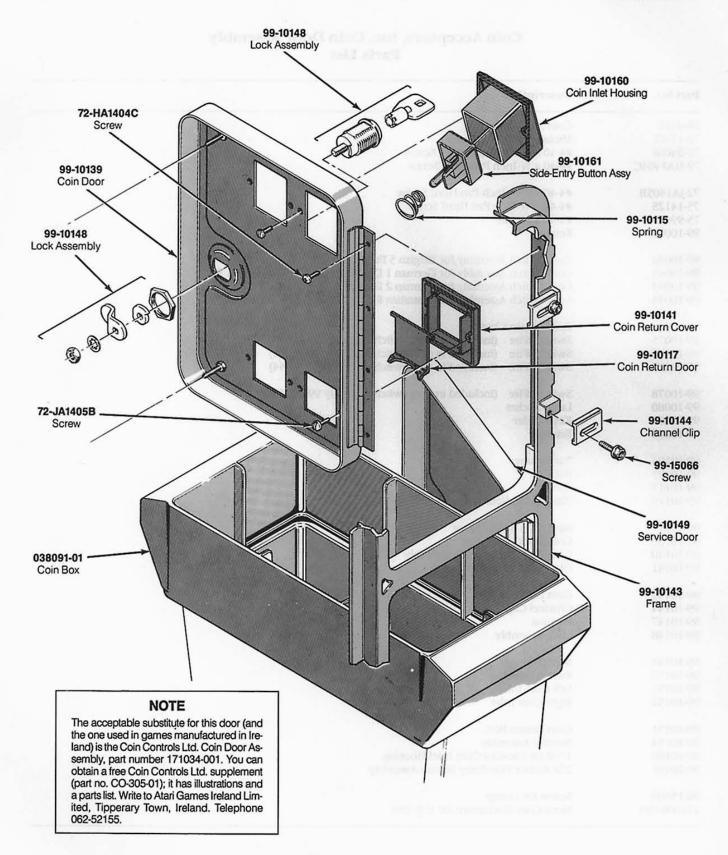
Coin Acceptors, Inc. Coin Door Assembly, Continued 171027-001 A
